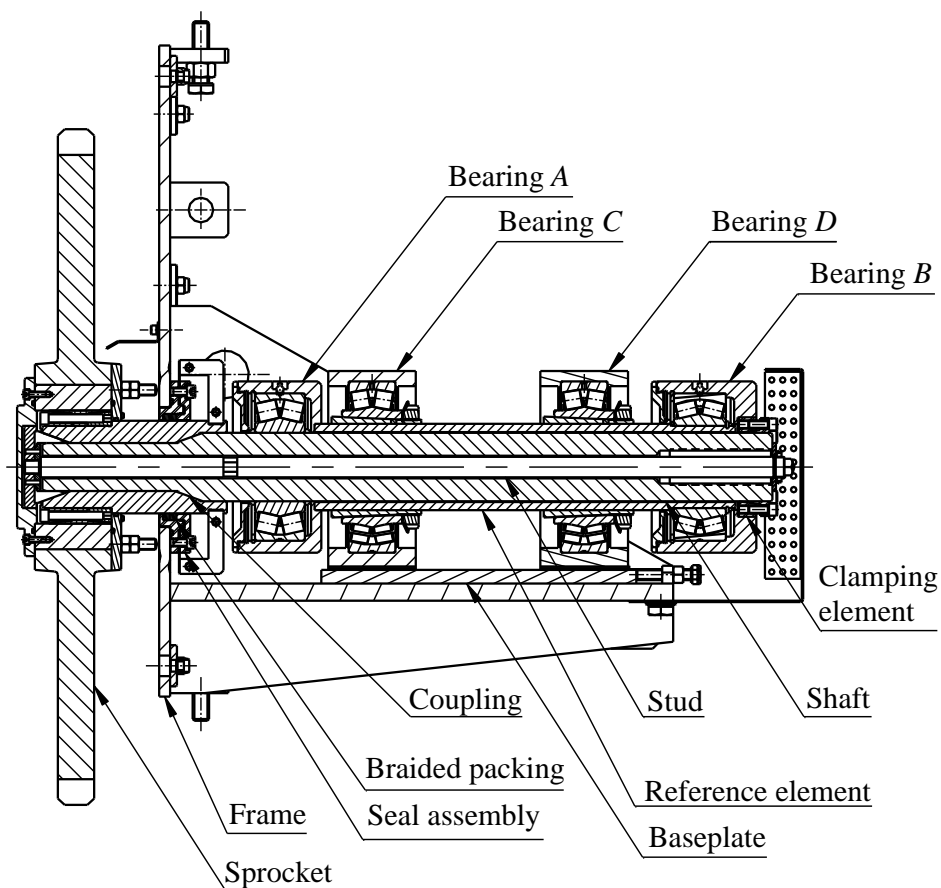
Design of the optimised sprocket shaft bearing assembly
